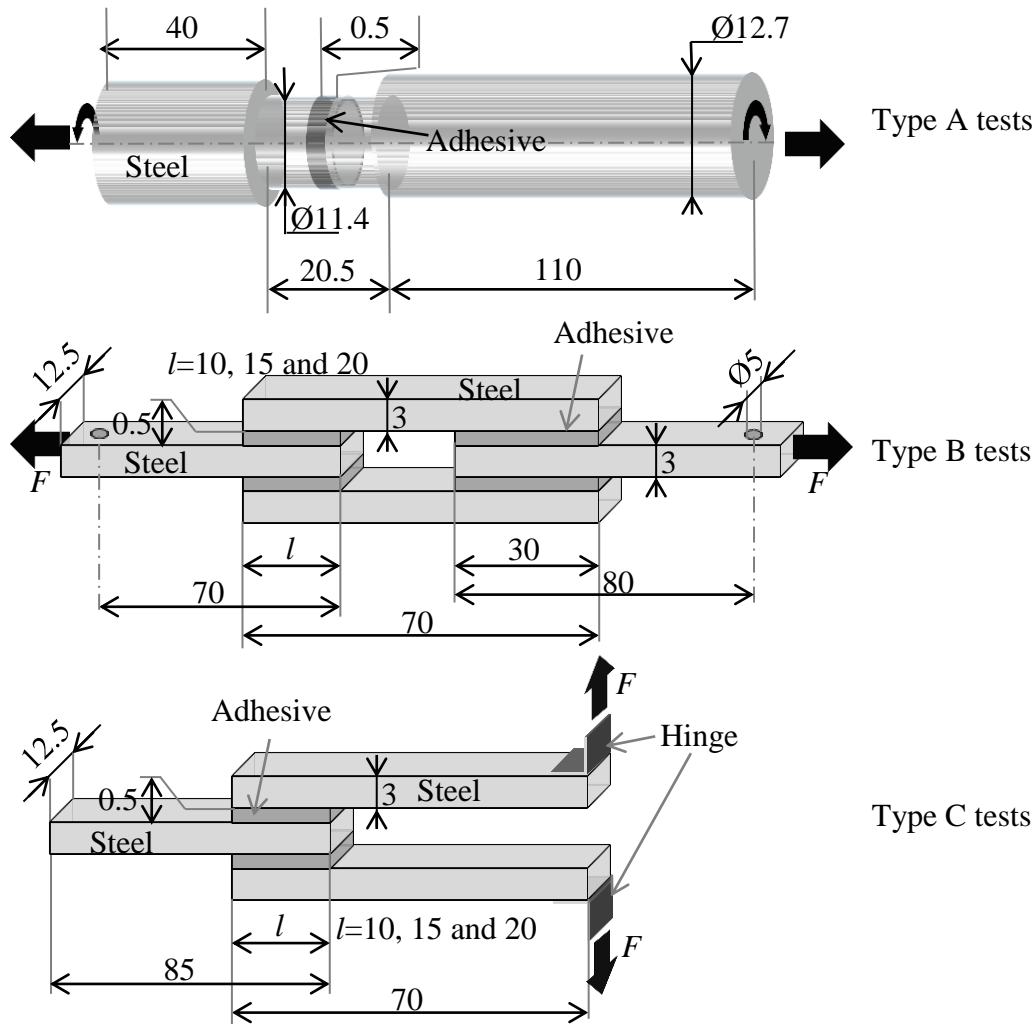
Joint specimens bonded with polyester and dimensions in mm
